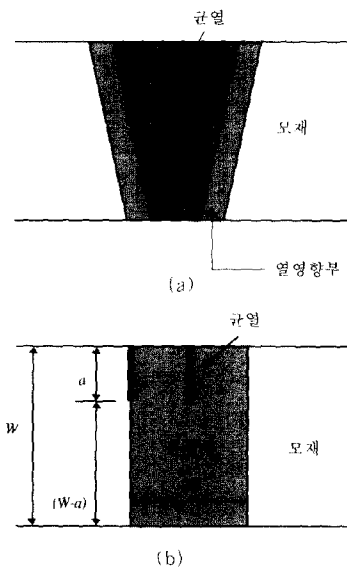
Schematic illustration of (a) "actual" weldments, and (b) "idealised" weldments
